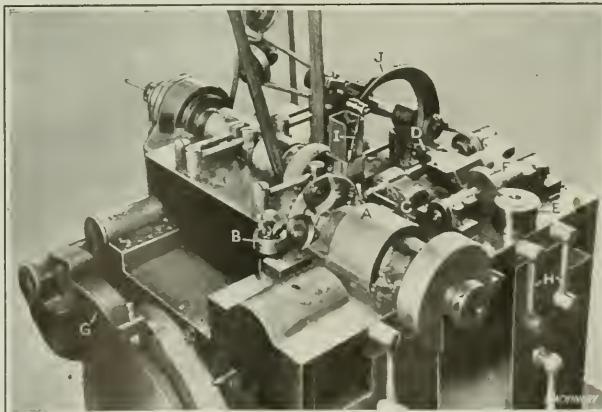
Automatic Pinion-making Machine, with Air and Cam Controls
